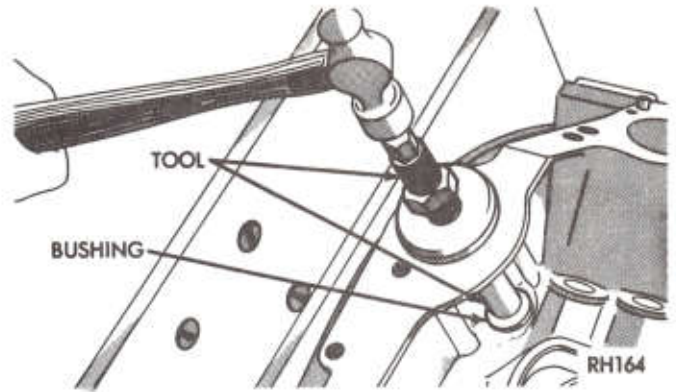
Installing Distributor Drive Shaft Bushing with Tool C-3053
